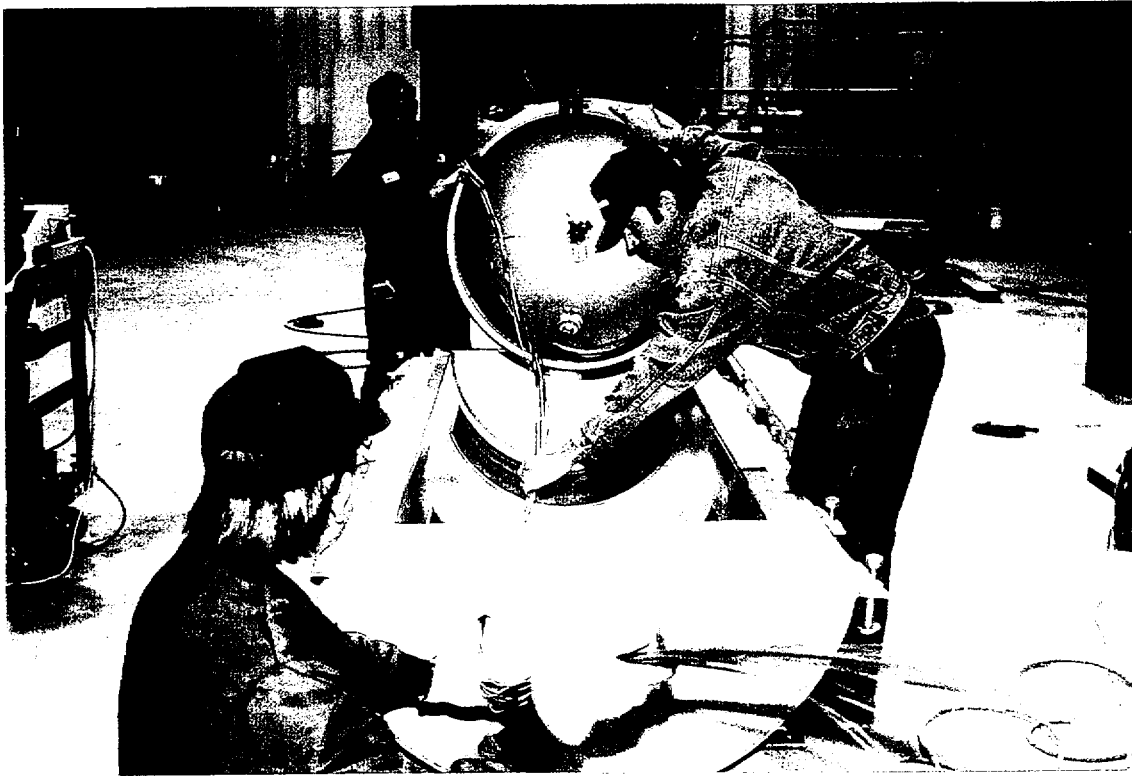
Thermocouples Routed Through Overpack End Opposite Valve End.
